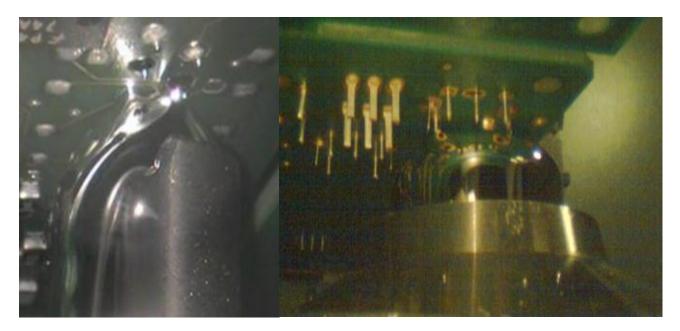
Solder fountain with "non-wetted" nozzle (left) and "wetted" nozzle (right). Photo courtesy of JUKI.
